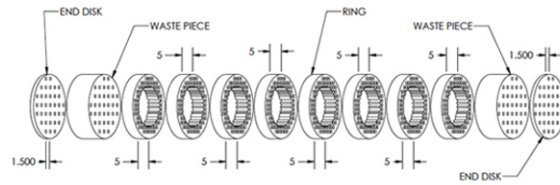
Exploded view showing o-ring specimen geometry harvesting from single DPF. Eight o-ring specimens are yielded per DPF and two end-disks for biaxial flexure testing are also produced.
